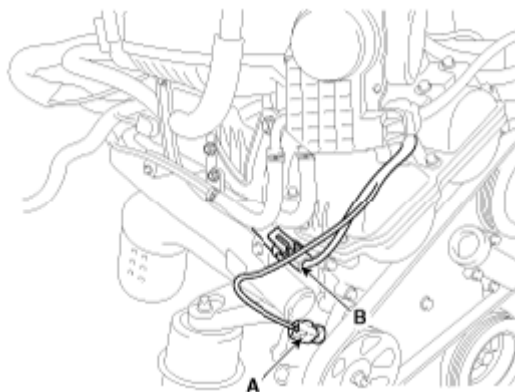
Identifying Connectors For Power Steering Oil Pressure Switch & RH Knock Sensor
